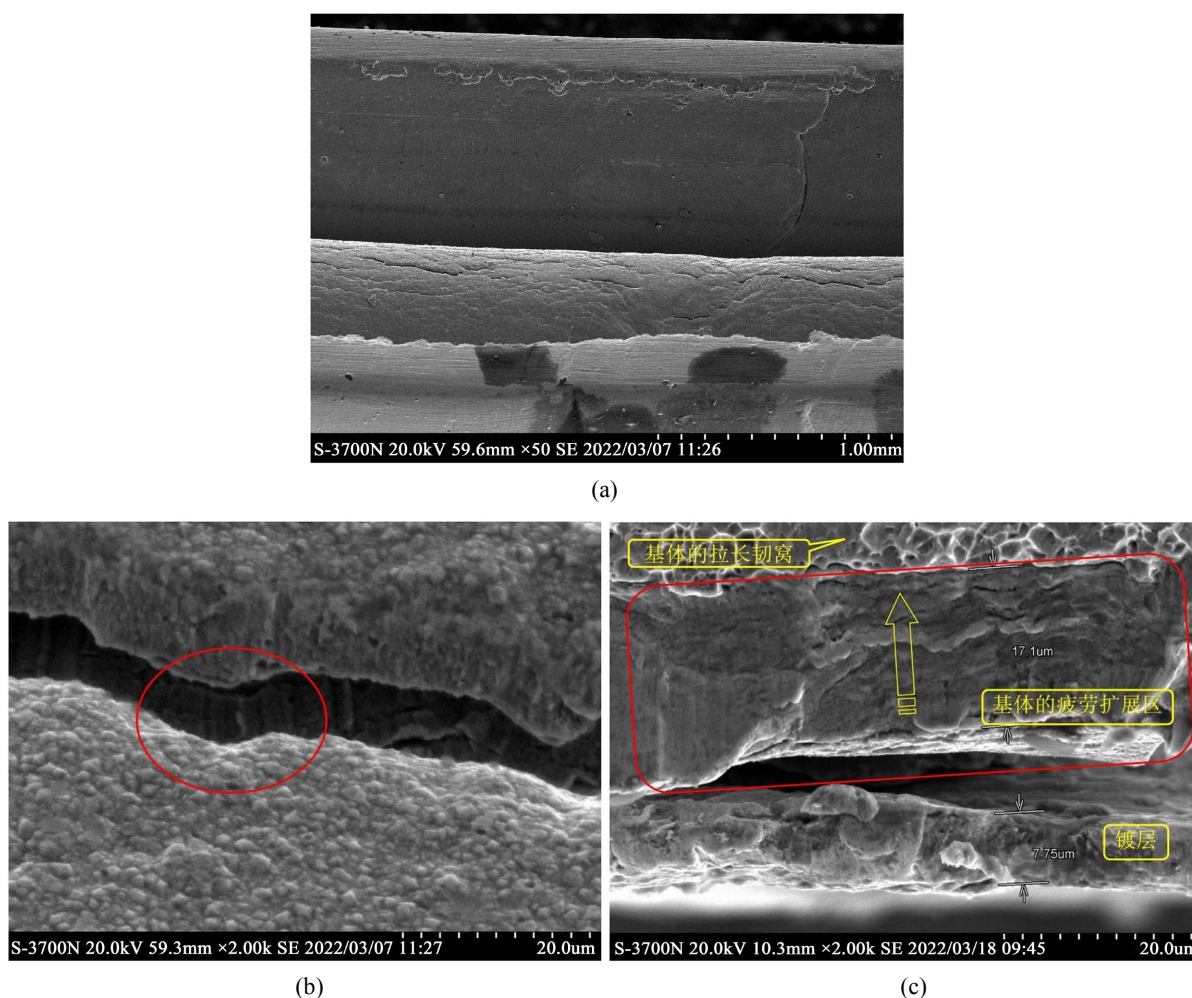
Microscopic of crack topography in the inner drum. (a) Inside weld; (b) Microcrack; (c) Morphology of the matrix at the inner drum
